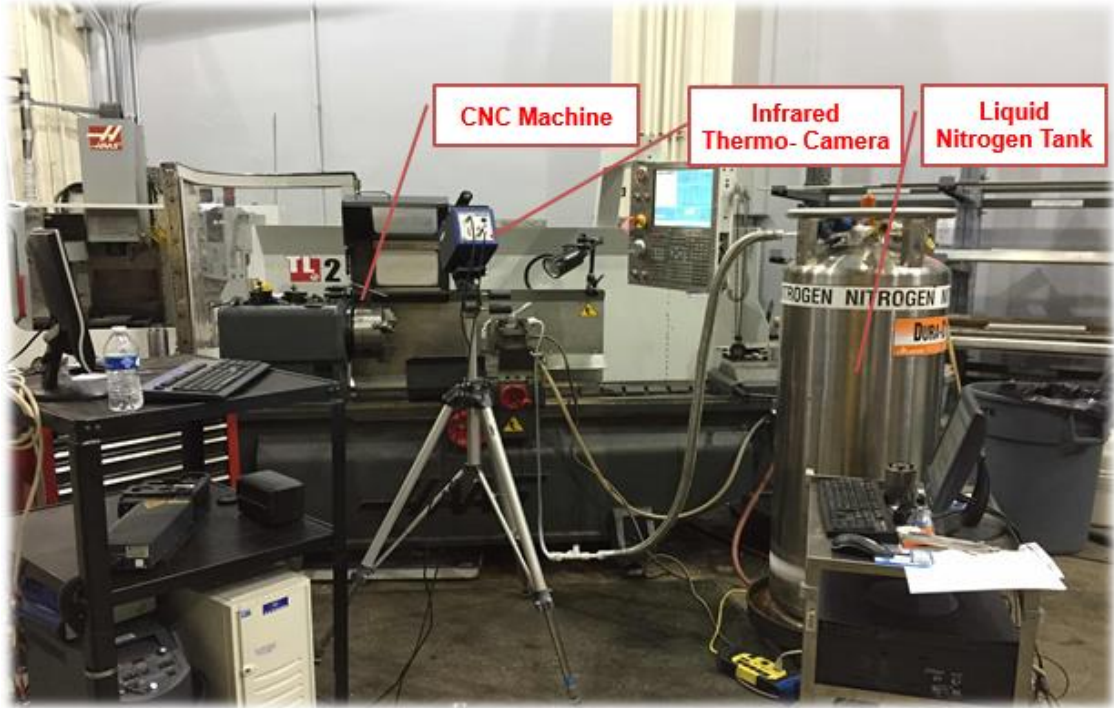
HAAS CNC Machining Center Equipped with Liquid Nitrogen Delivery System and Infrared Thermo- Camera
